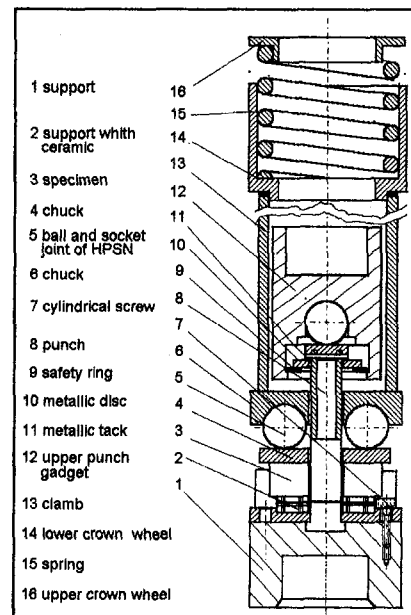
Equipment for testing ceramic-metal specimens at high temperatures
